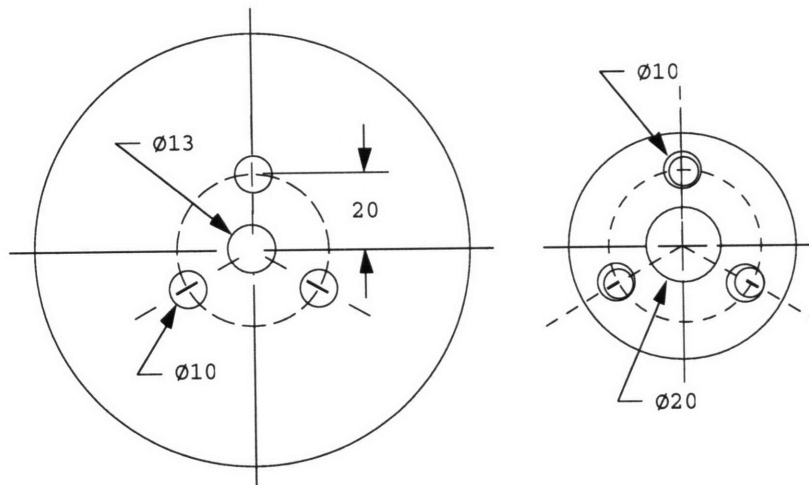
A schematic showing the dimensions of the cap and of the pin that connects the two end caps.
